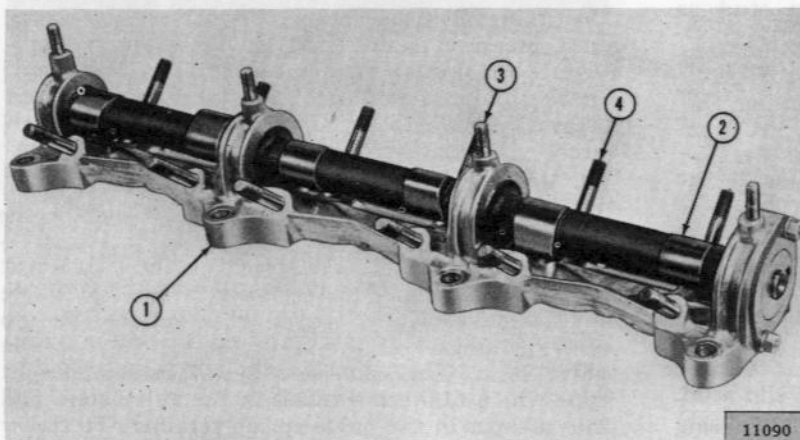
CAMSHAFT AND CAM BEARING SUPPORT DECK
